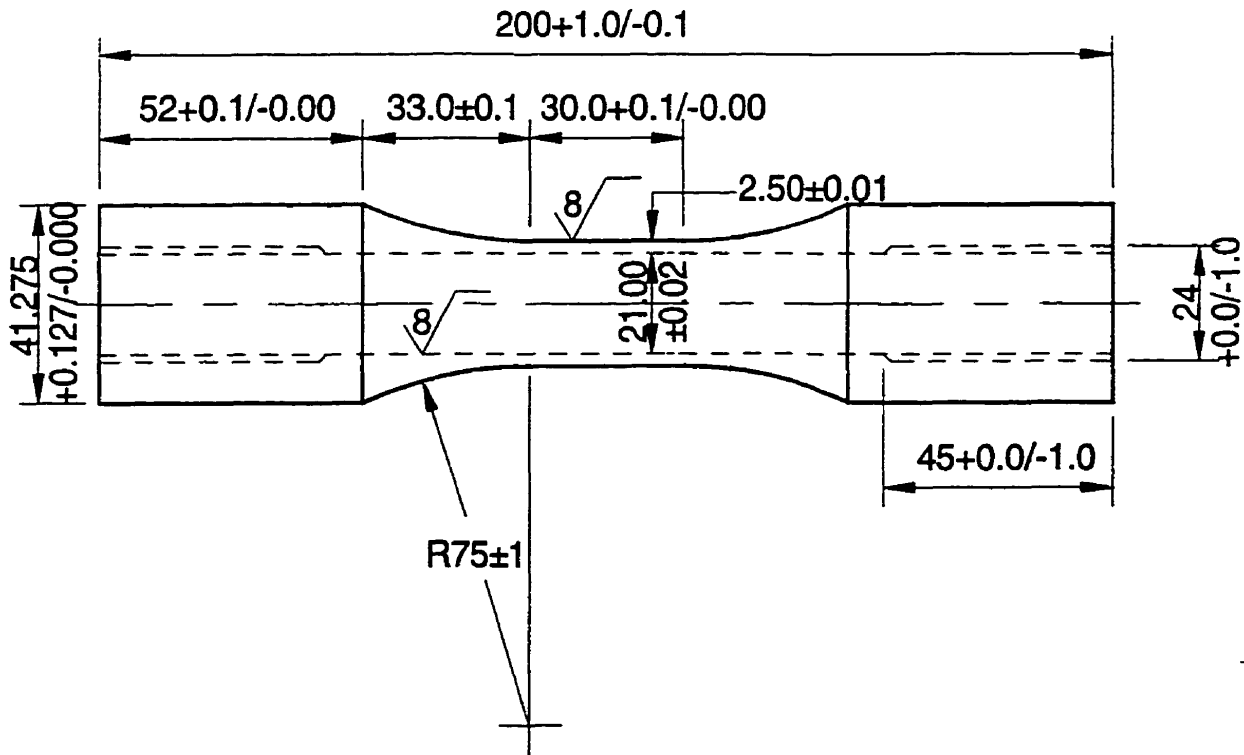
Axial-torsion specimen. All dimensions in mm.
